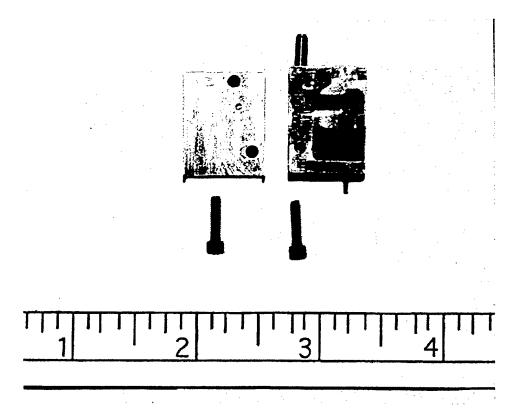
A Pre-assembly View of the Blade Locking Device That Allowed the Blades to Deploy at the Desired Time.
